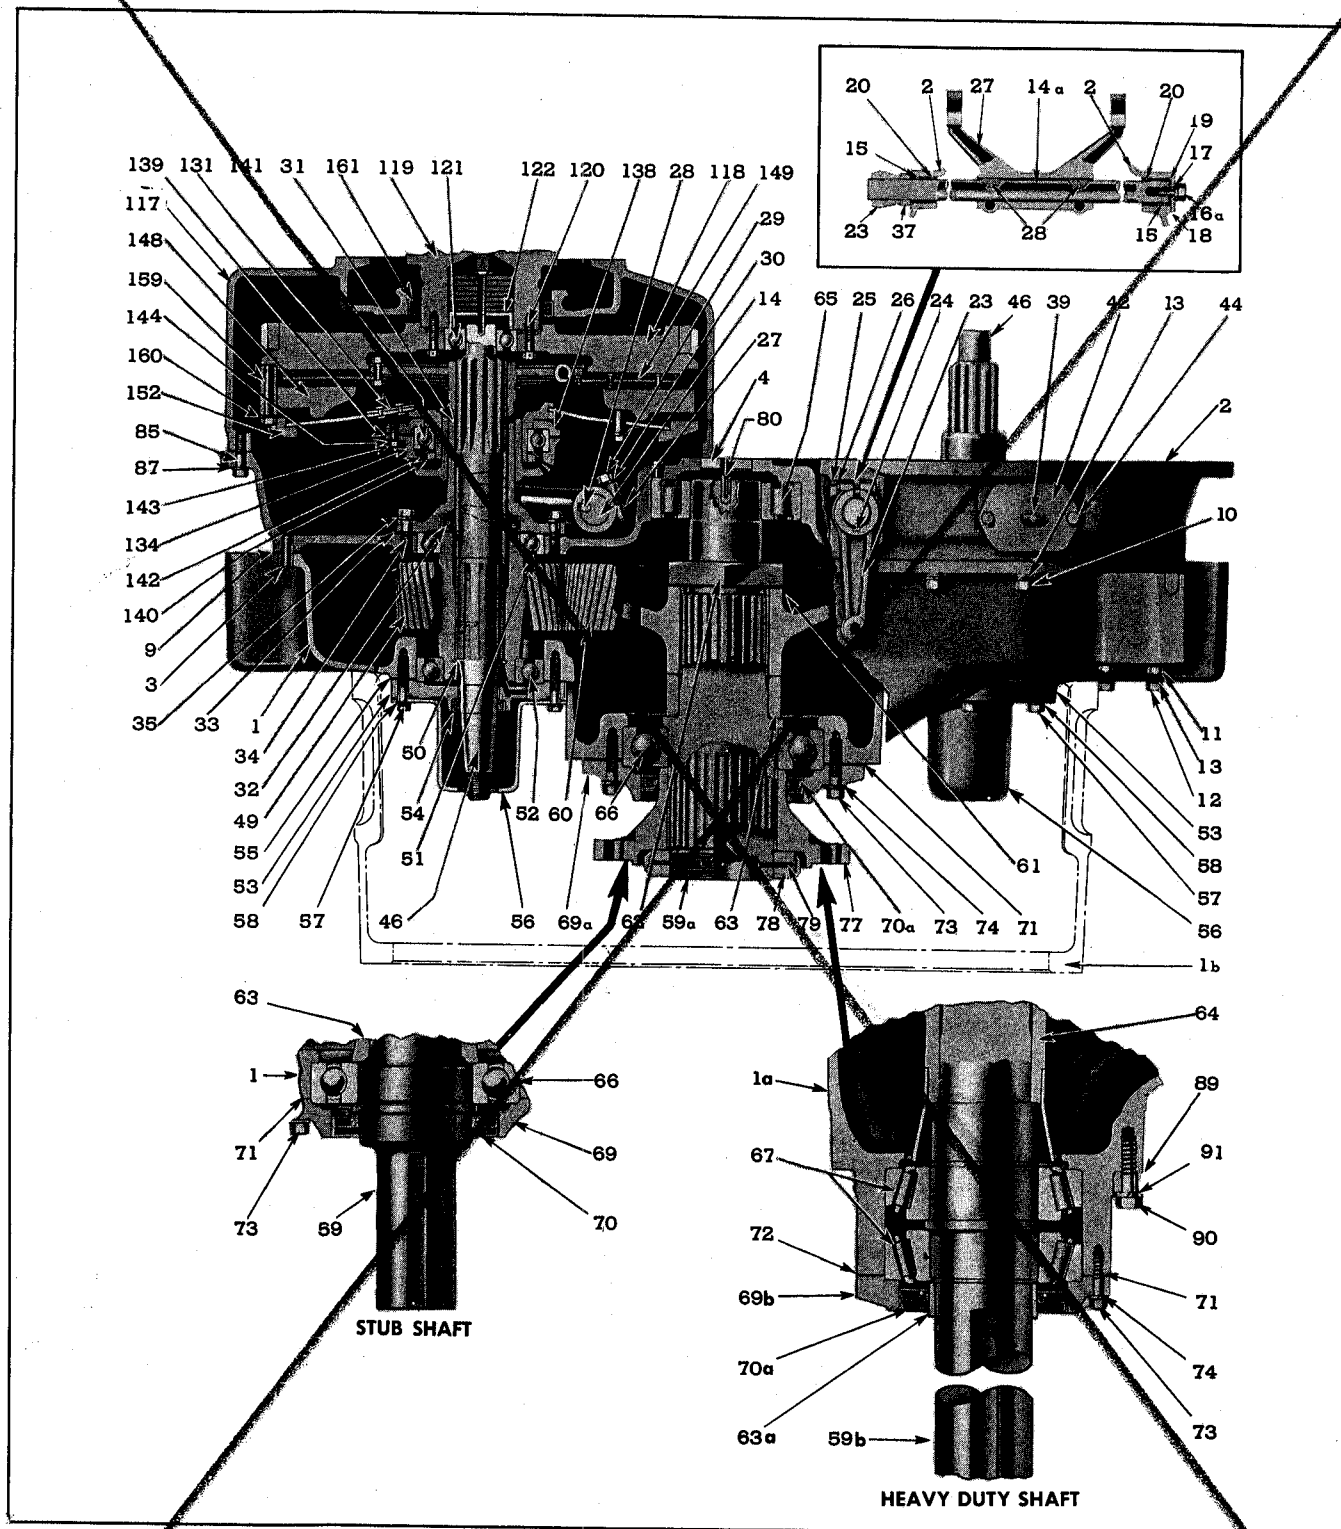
Twin Engine Power Transfer Gear and Clutch Assembly for Industrial Units.
